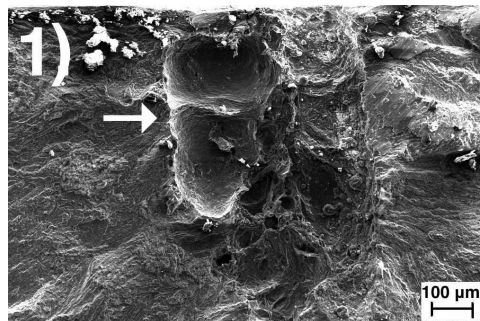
Large pores as the initiation point of the fatigue crack of AA6082.50-T6 as welded.
